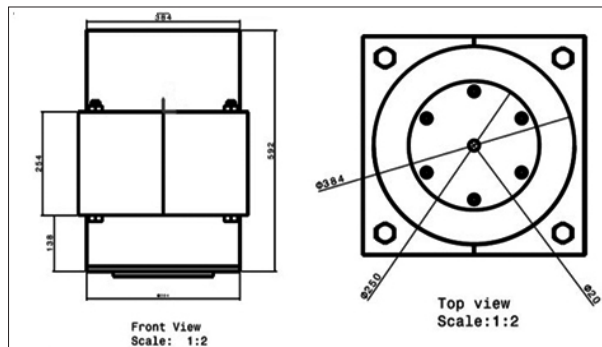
Dimensions of front view and top of vacuum chamber (dimension are in mm).
